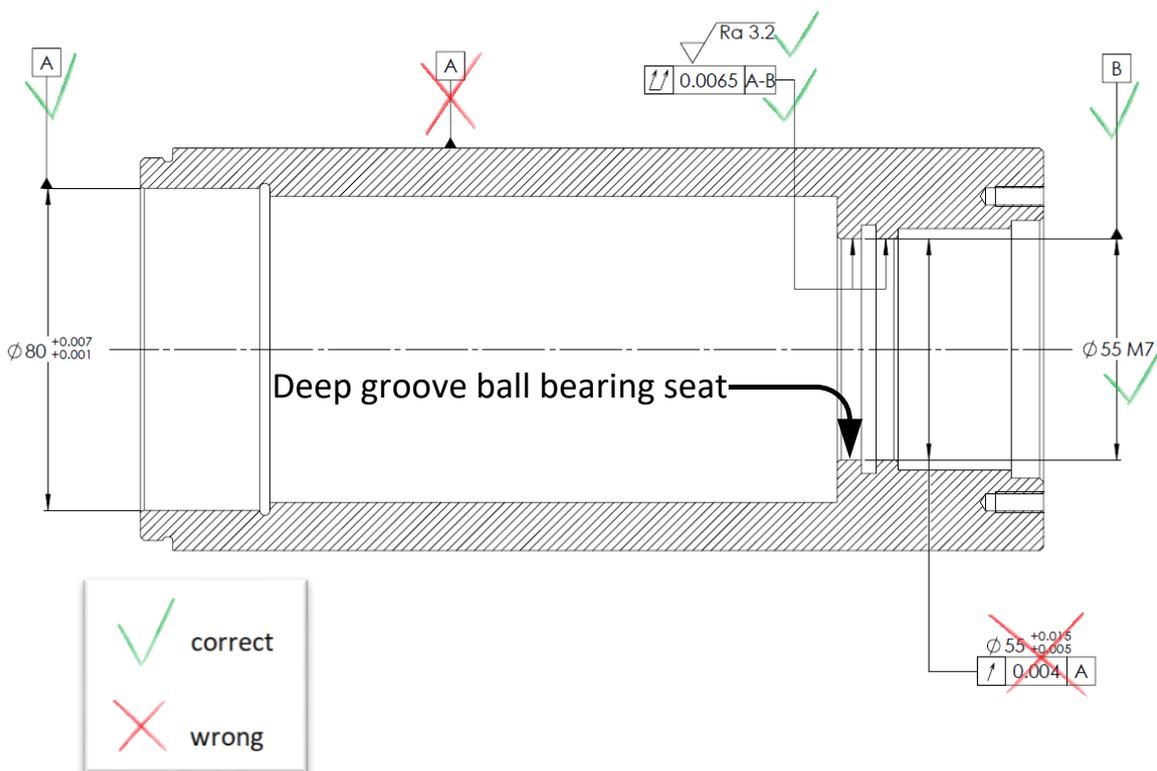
Tolerance correction on the right side of the spindle pipe.
